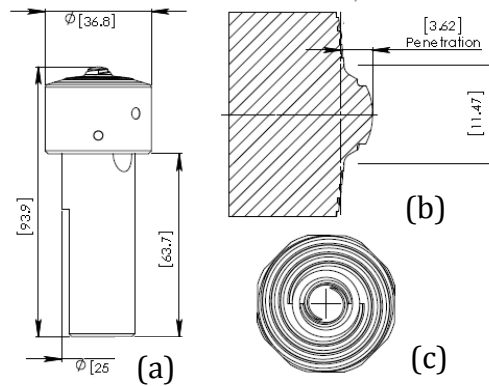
Schematic of Q70 Megastir tool (a) Complete tool (b) Pin (c) Top view of pin
